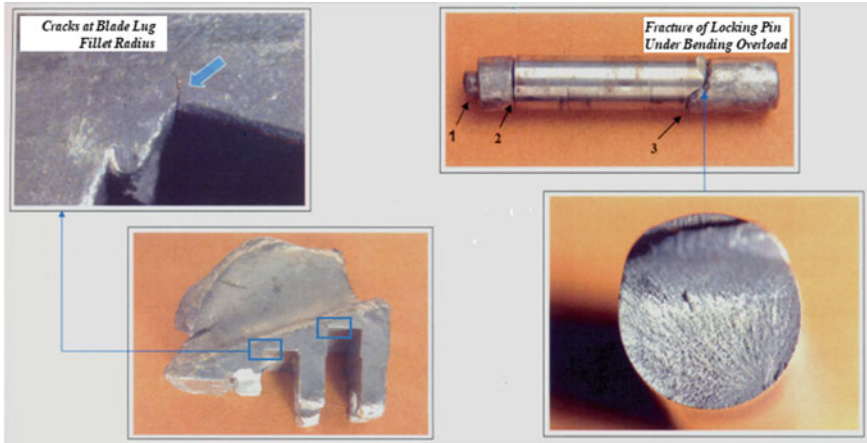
Fatigue cracks at blade lug fillet radius, and fracture of locking pin under bending overload
